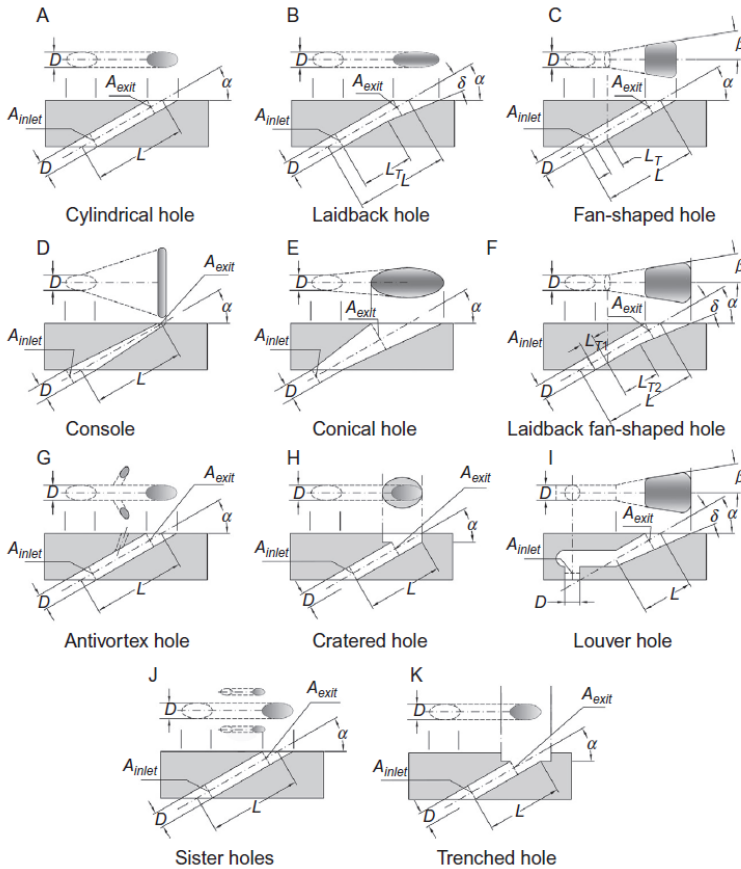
Shaped hole geometries investigated for film cooling [54].
